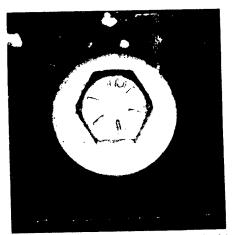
Figure XIII - Chromated IVD Al Plated Joint C Assembly
